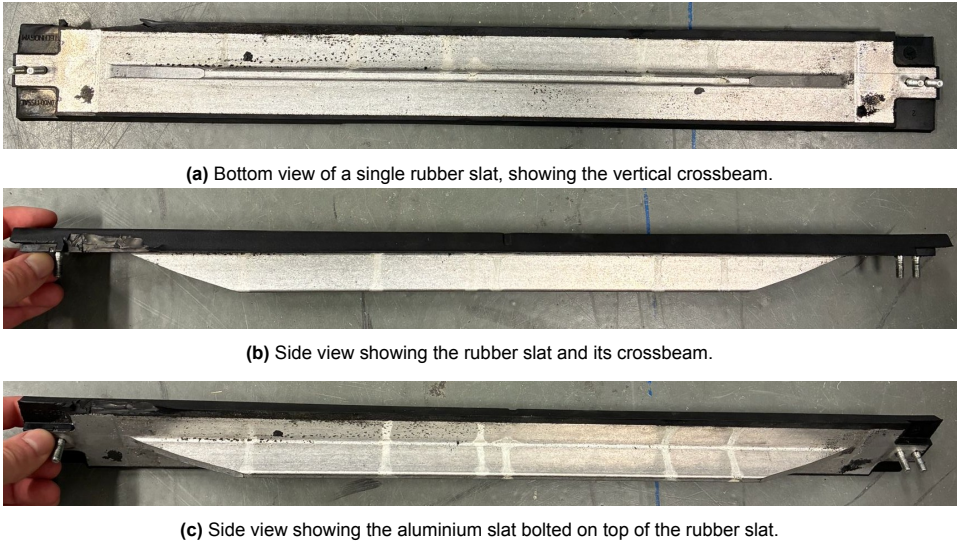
Close-up views of a single treadmill rubber slat and the aluminium slat mounted on top of it.
